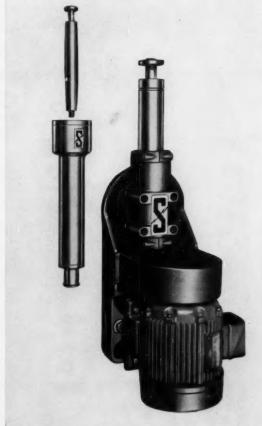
Grinder attachment for converting vertical turret lathe and boring mills into vertical chucking grinders
